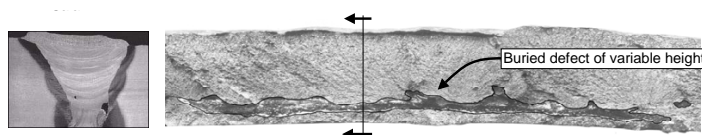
Lack of fusion defect as seen in a weld macrograph (left) and after a forced brittle fracture (right) [1.32].
